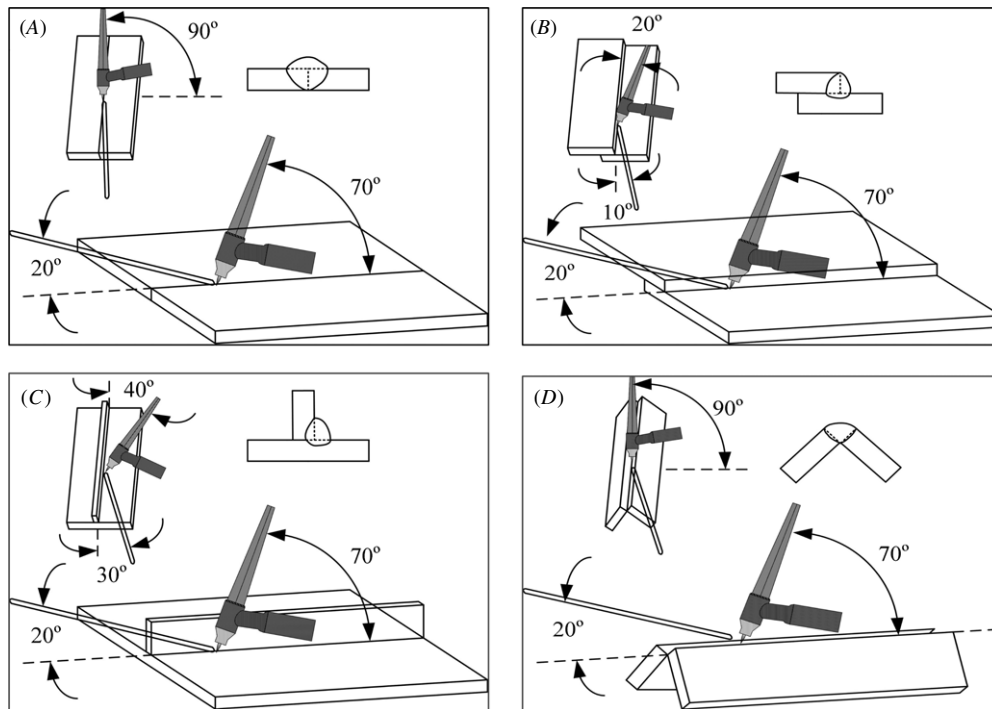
Torch orientations for different weld types in the GTAW process: (A) butt welds; (B) lap joint; (C) T-joint; and (D) corner joint.
